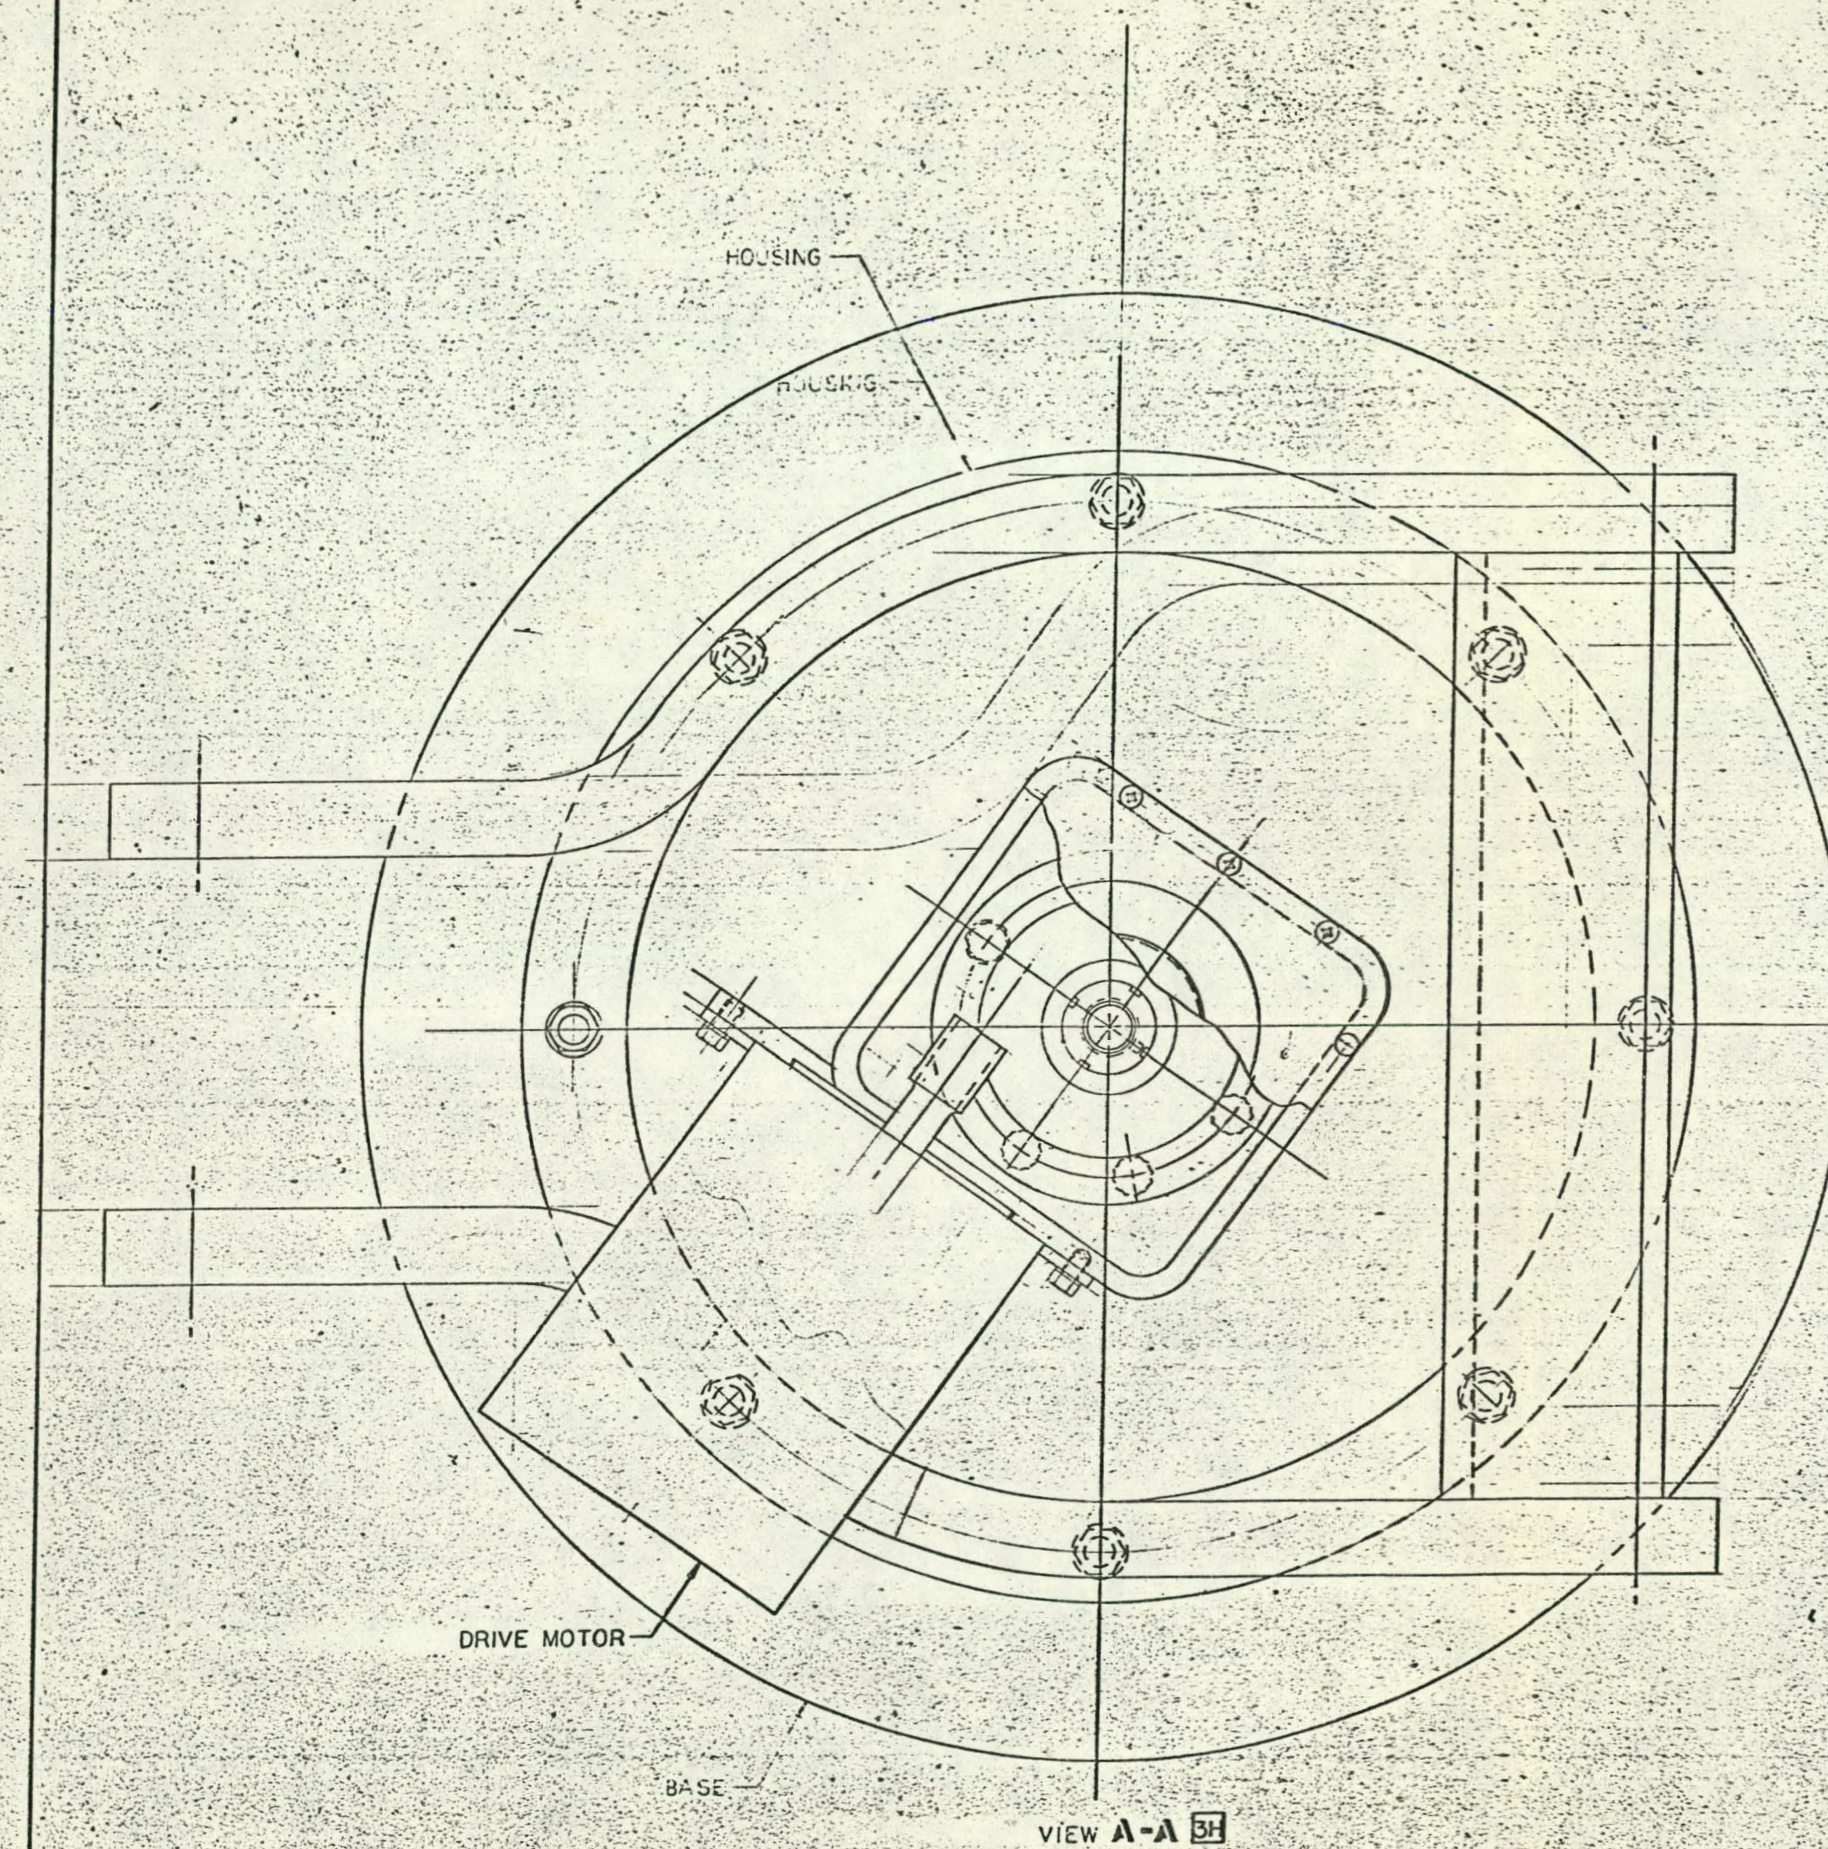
Layout - Azimuth Drive Assembly
